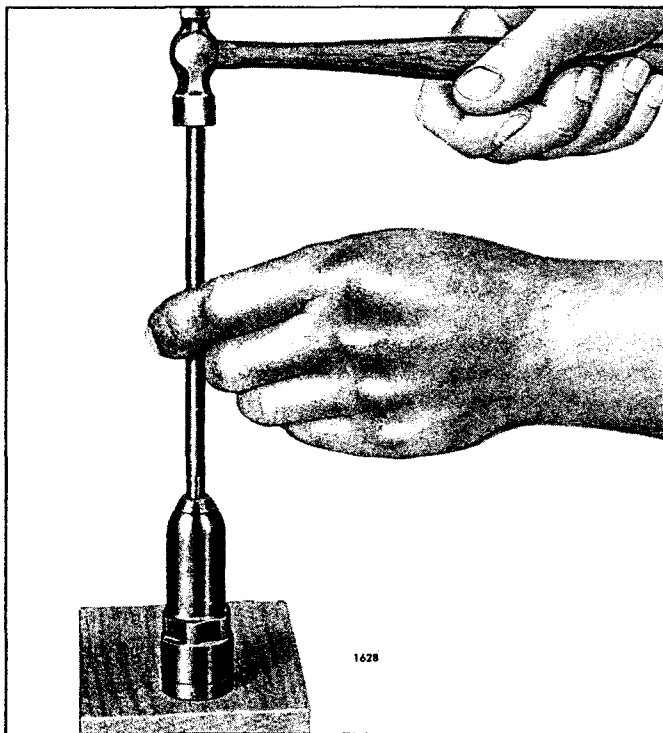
Removing Spray Tip from Injector Nut Using Tool J 1291-02
